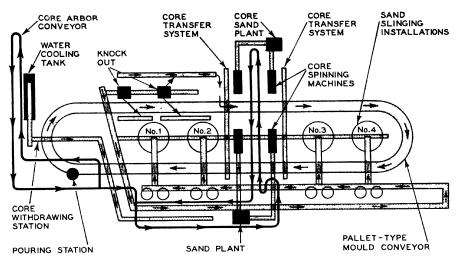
LAYOUT OF HIGH-SPEED MASS-PRODUCTION FOUNDRY PRODUCING EIGHT CASTINGS PER MINUTE
